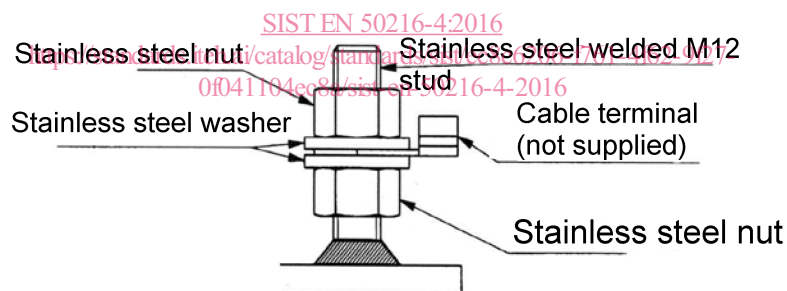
Typical earth terminals used for transformers type B1, B2 and B3
